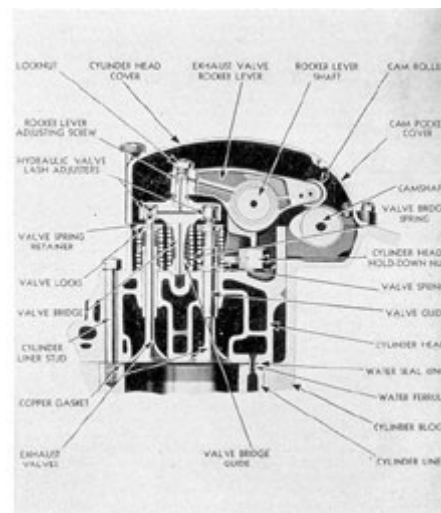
Cylinder head cross section through exhaust valves, GM.
